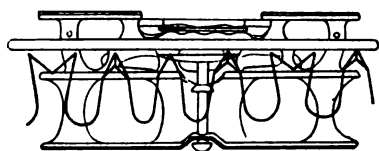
RAKER GAUGE CUTTING DOWN RAKERS
